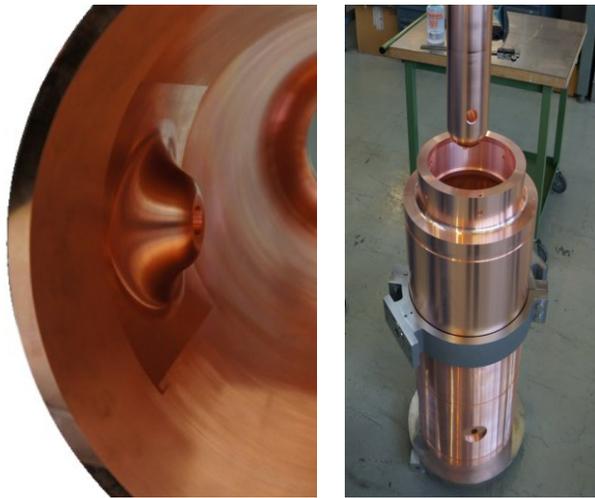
left) detail of beam ports finish; right) Inner and outer conductors being assembled by shrink fit.
